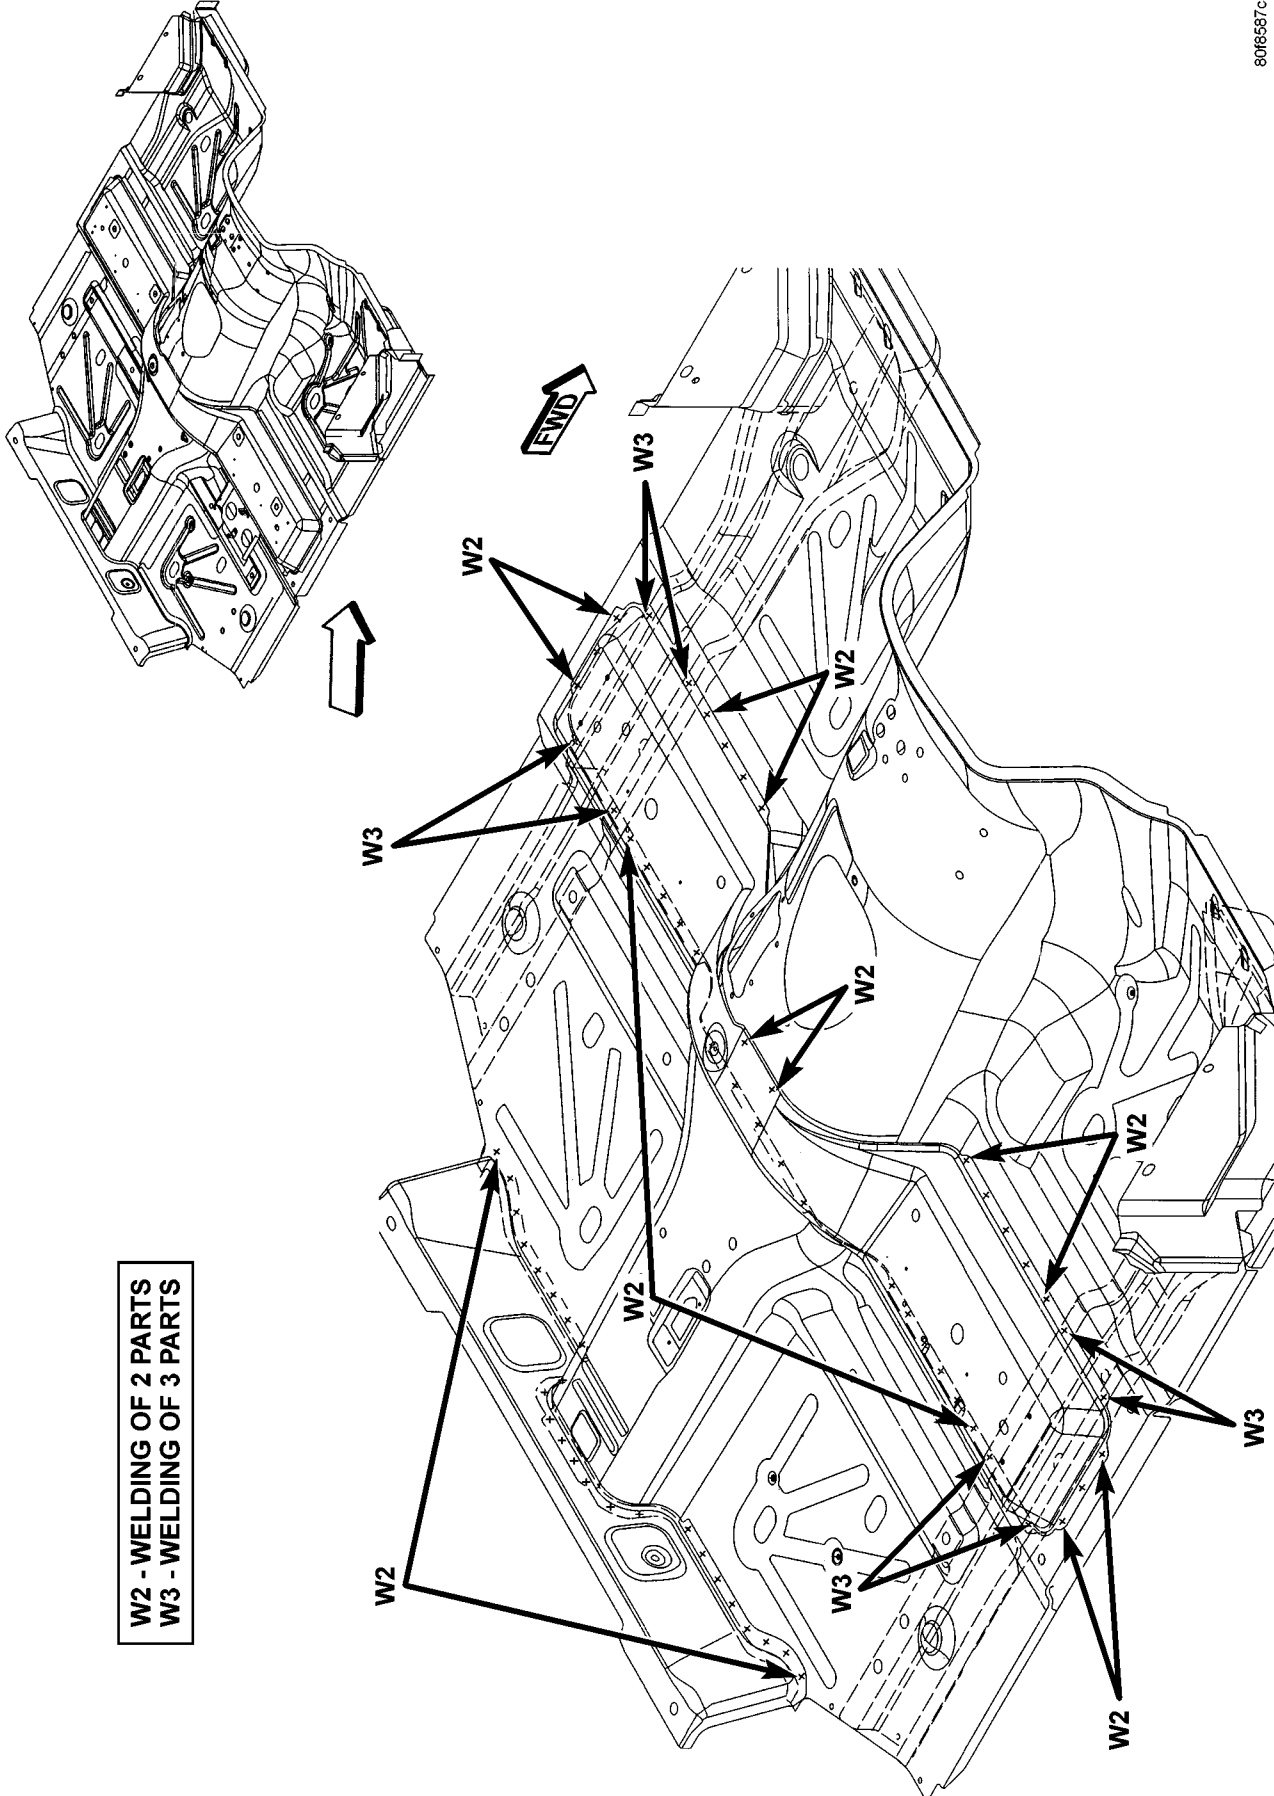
FRONT FLOOR PAN (2 OF 3)
